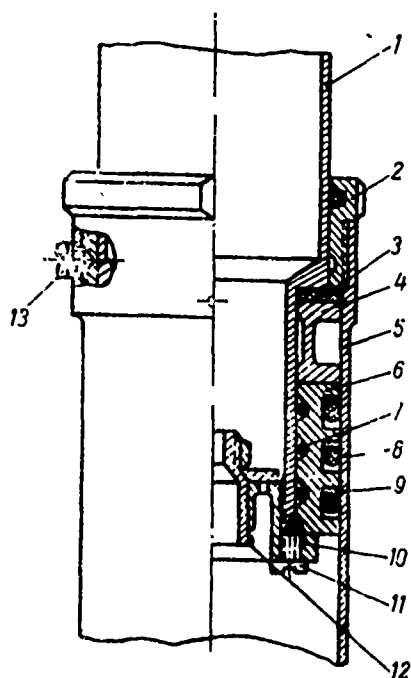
Rod packing of the tail wheel shock absorber on aircraft from the 124 series: 1 - rod; 2 - upper bronze sleeve (nut); 3 - fiber packing; 4 - duralumin spacing ring; 5 - cylinder; 6 - lower bronze sleeve; 7, 8 - rubber ring; 9 - leather ring; 10 - nut valve; 11 - counter-pin; 12 - hollow bolt of valve (diffuser); 13 - counter-pin.
